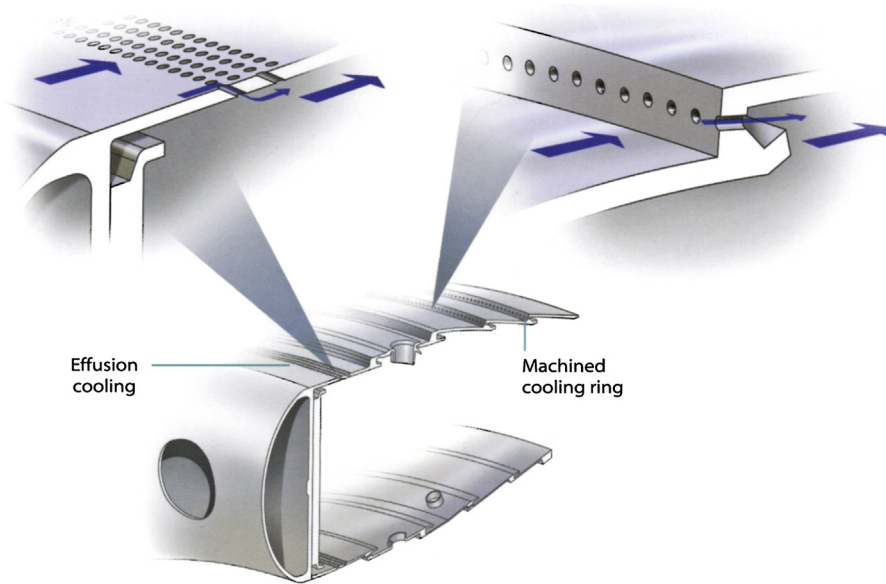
Machined cooling ring and diffusion cooling holes. (Source: Rolls Royce.)
